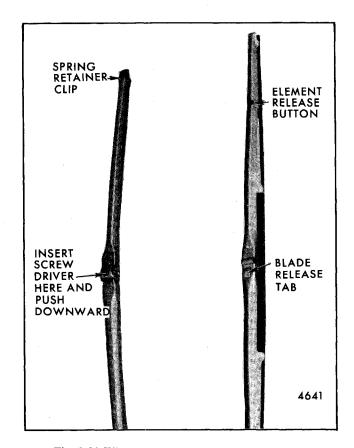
Wiper Blade Assemblies - H, X Styles
